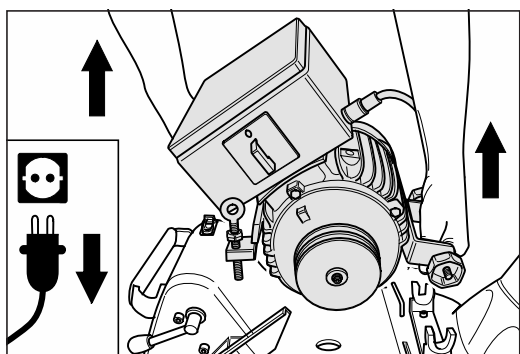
Remove the motor from the machine housing. Similar to figure.
